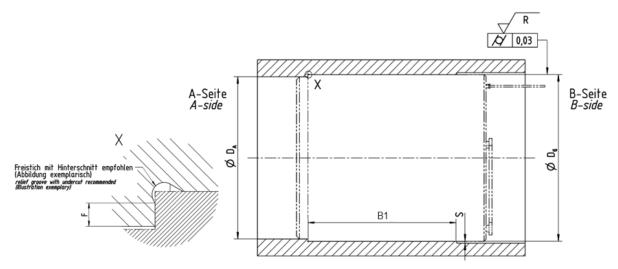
Recommended housing dimensions for adhesive connections and clearances
